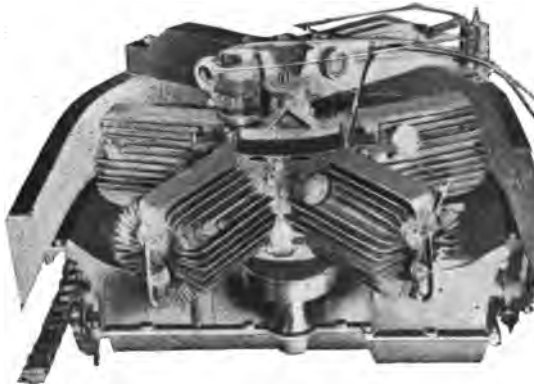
Revolving-Cylinder Motor of Adams-Farwell Car, in Mounting on Frame. Adams Company, Dubuque, Iowa.
